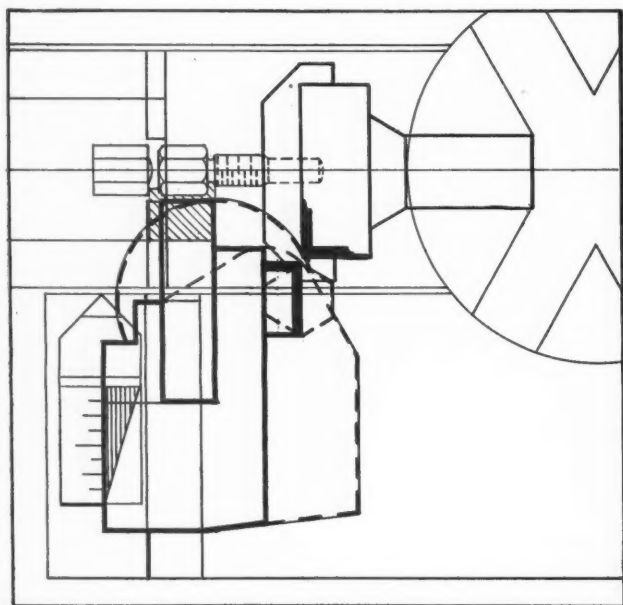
Diagram used to determine if Hollow Mill and Forming Tool interfere
